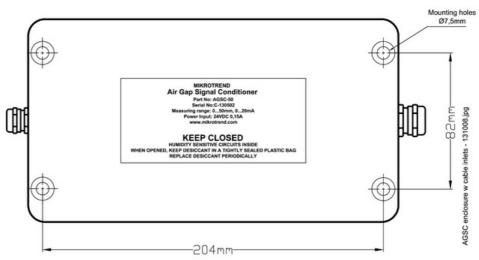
AGS Signal Conditioner unit enclosure with cable inlets (CAB), (mounting dimensions)
